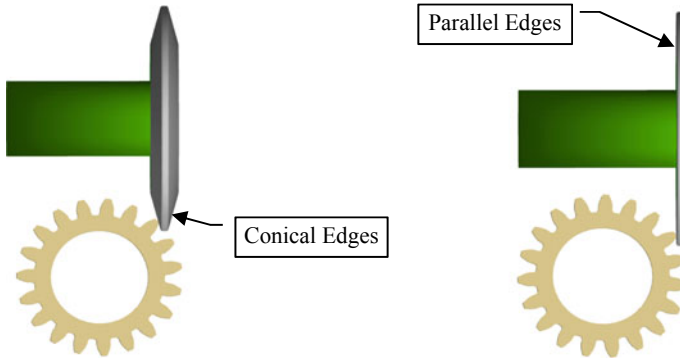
Spur gear Tip chamfering with a CoSIMT
